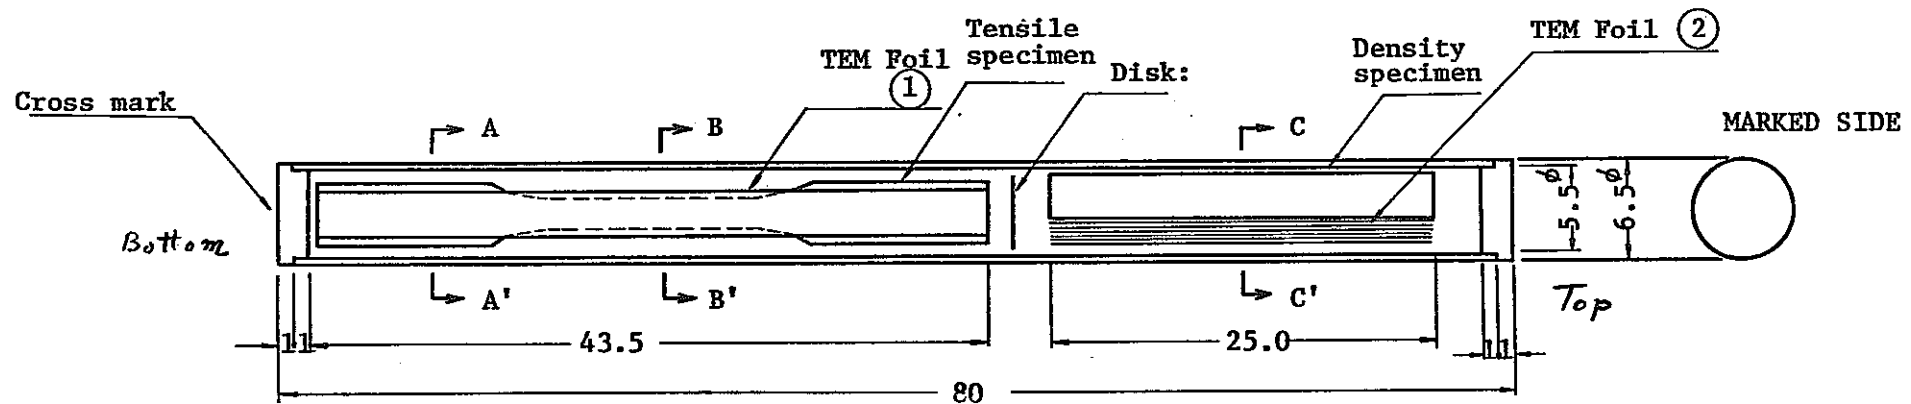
ARRANGEMENT OF TEST SPECIMENS IN CAPSULE
